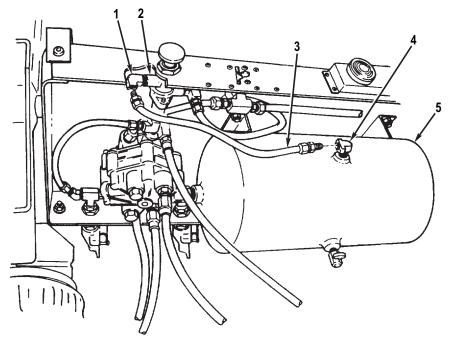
Airbrake Valve-to-Air Reservoir Tube Assembly Replacement.
